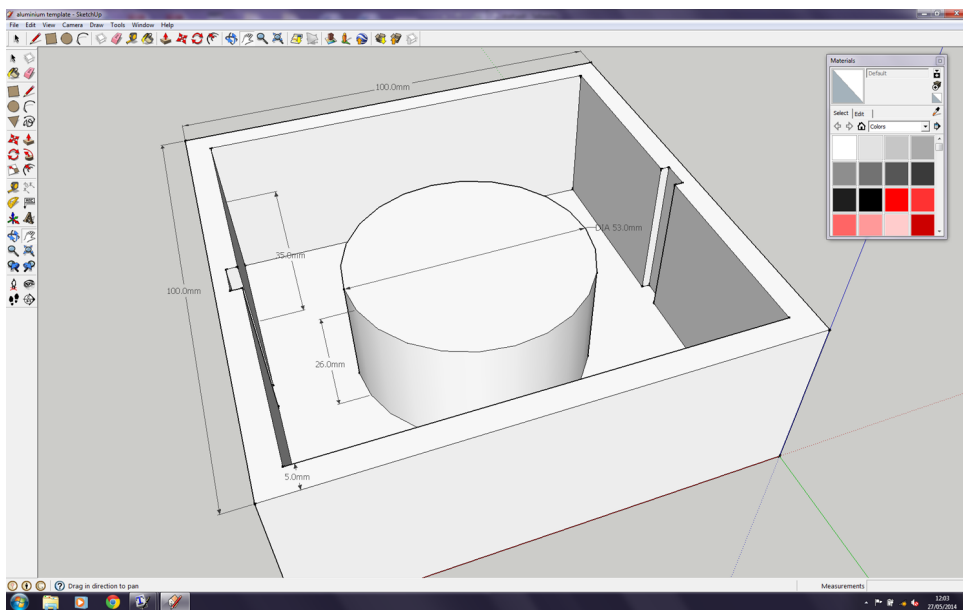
Aluminium mould template for casting the fast neutron buttons
